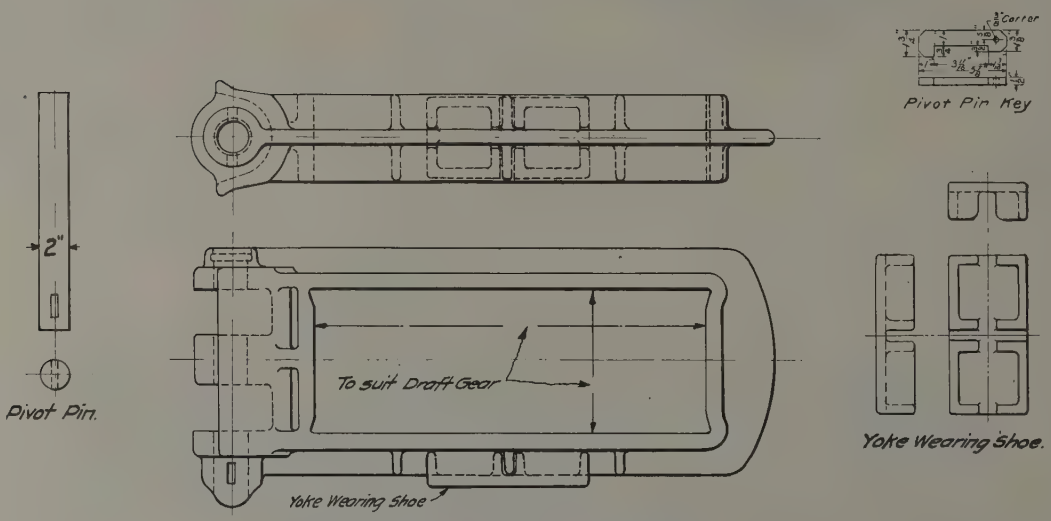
Cast Steel Yoke with Quadruple Shear Pivot Pin.
